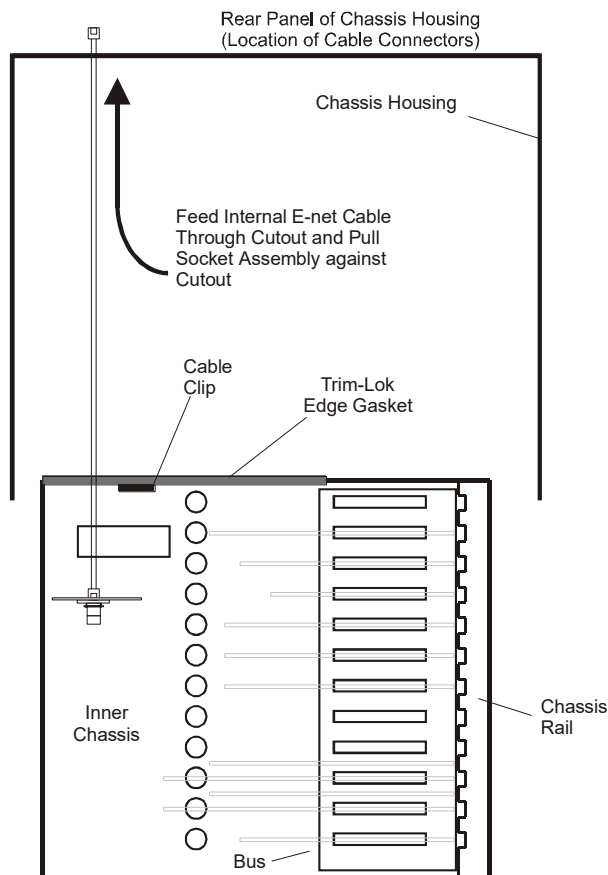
Feeding the internal Ethernet cable through the cutout to pull the RJ-45 Coupler Assembly into position on the rear panel of the DFR
